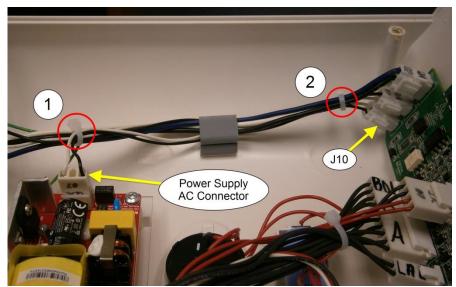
AC to Power Supply Wire Assembly Tie-Wraps
